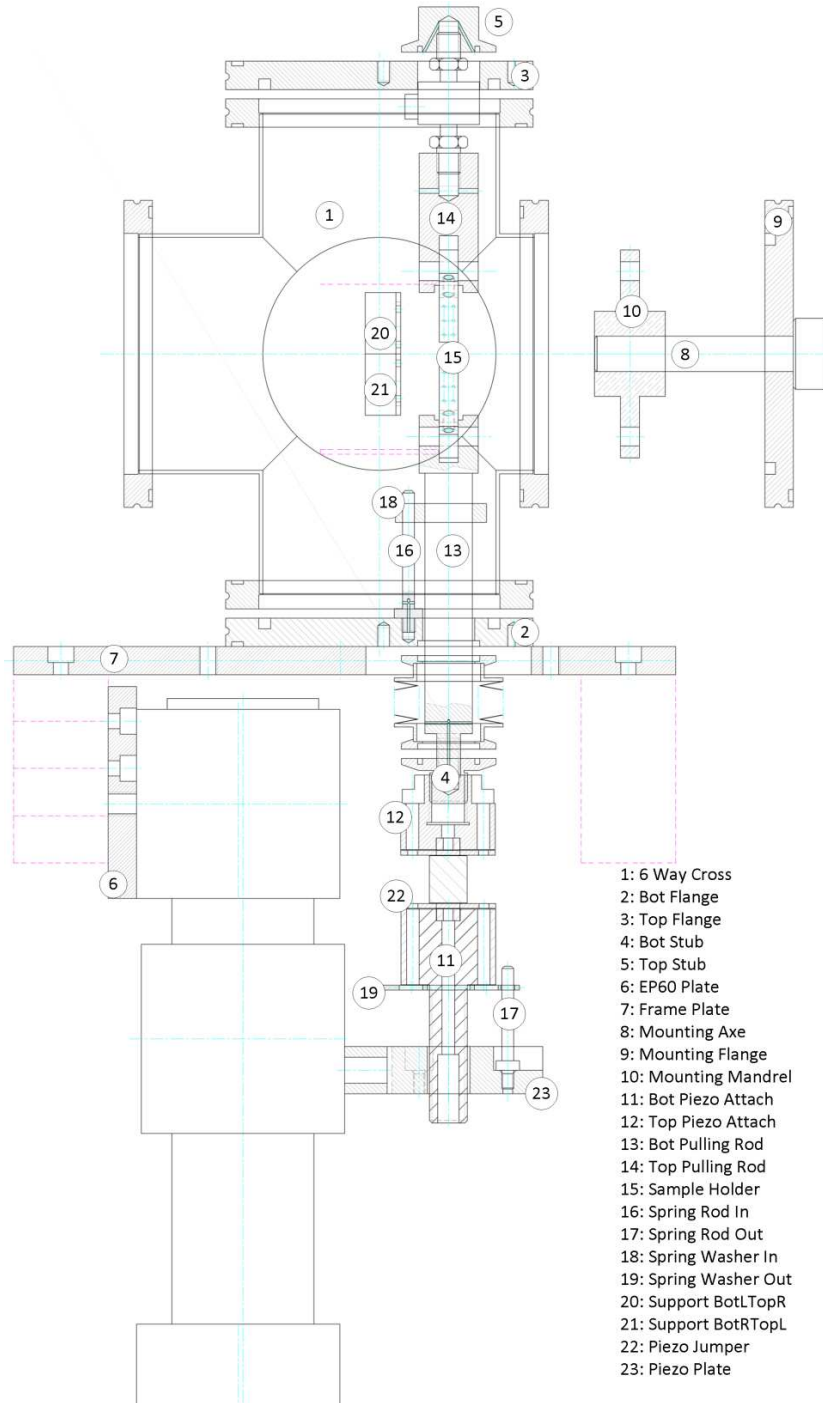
Assembly draft of the modified or manufactured pieces.
